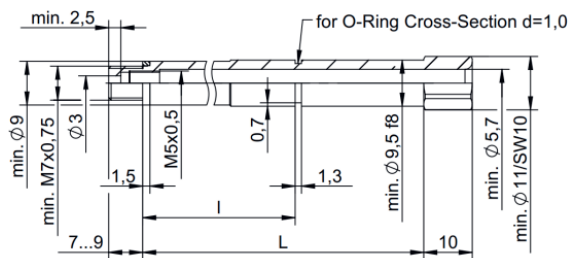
Mounting sleeve M7 Type 6595ASP...
